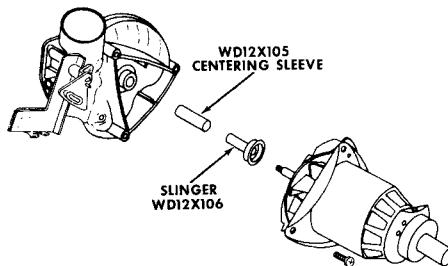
Centering Sleeve Insures Proper Centering of Motor Shaft
